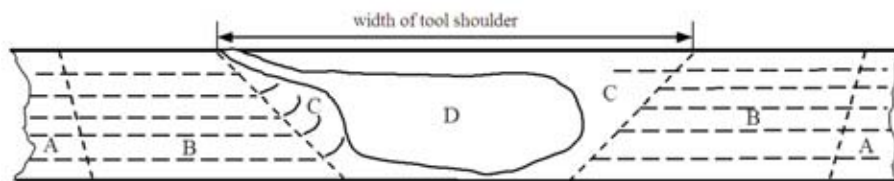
Characteristic region in the FSW welded joint A - parent material, B - Heat affected zone, C - Thermomechanically affected zone, D - Weld nugget [2]
